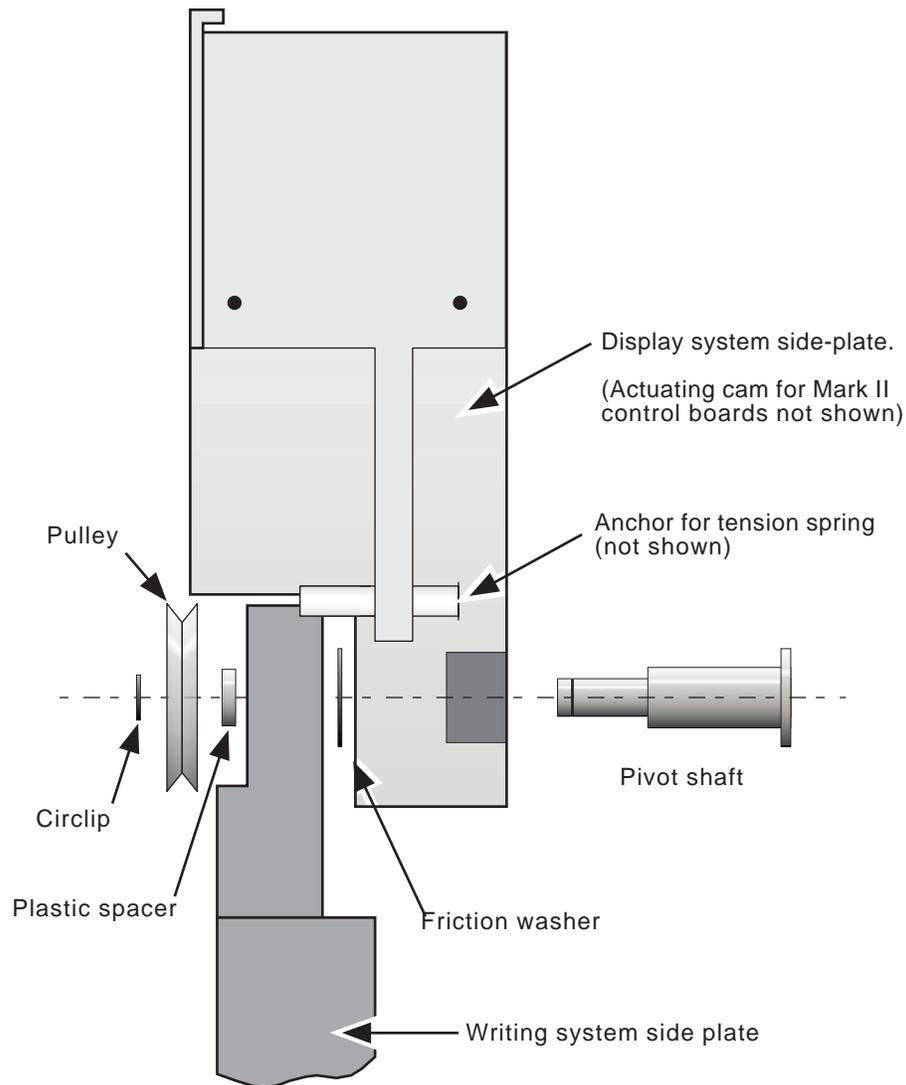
Right-hand pivot assembly (rear view). Left-hand similar.
